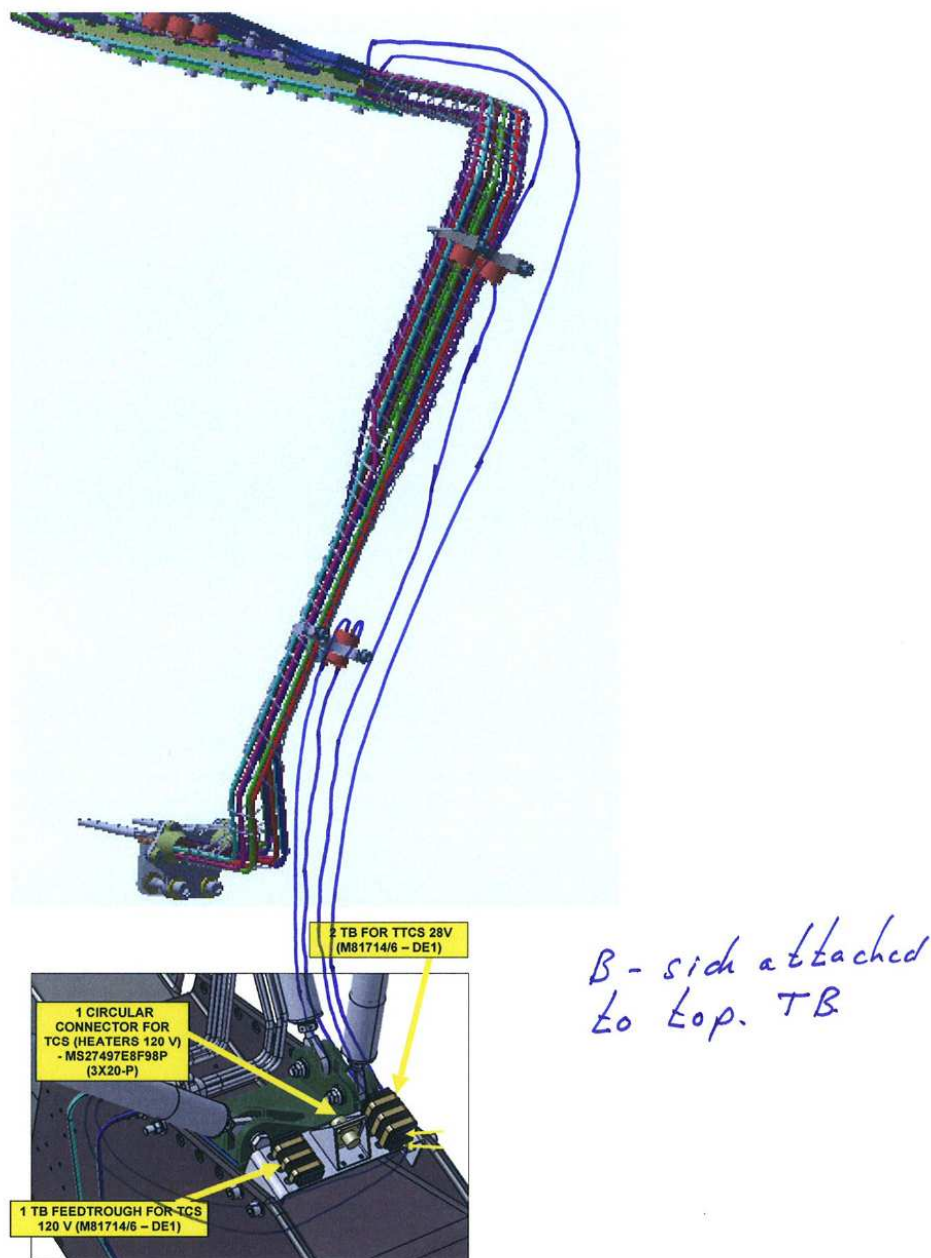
Wiring lay-out liquid line wire heaters B-side
